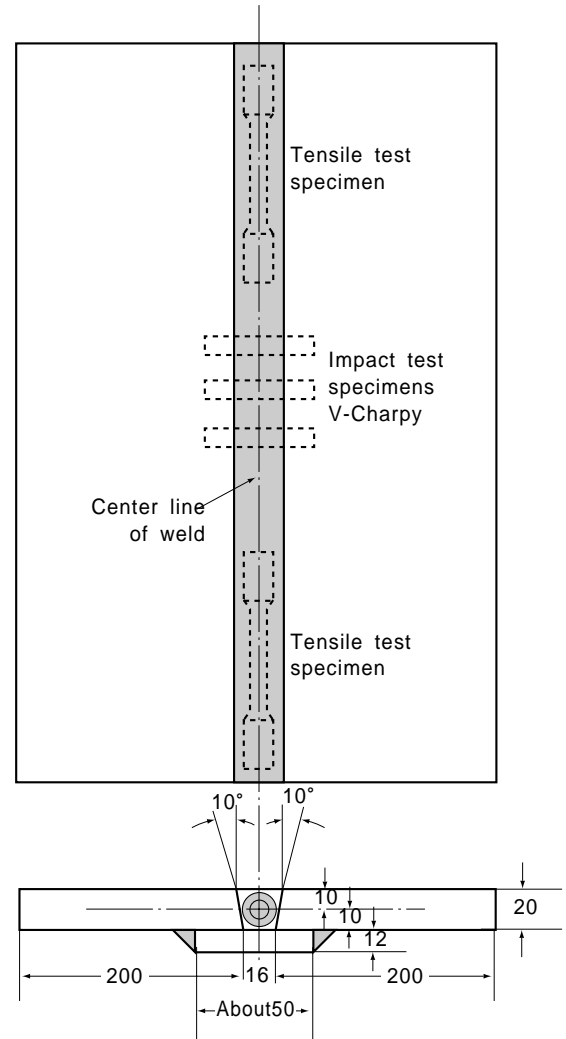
Deposited Metal Test Assembly with Multi-run Technique (Automatic Welding, Unit : mm)
